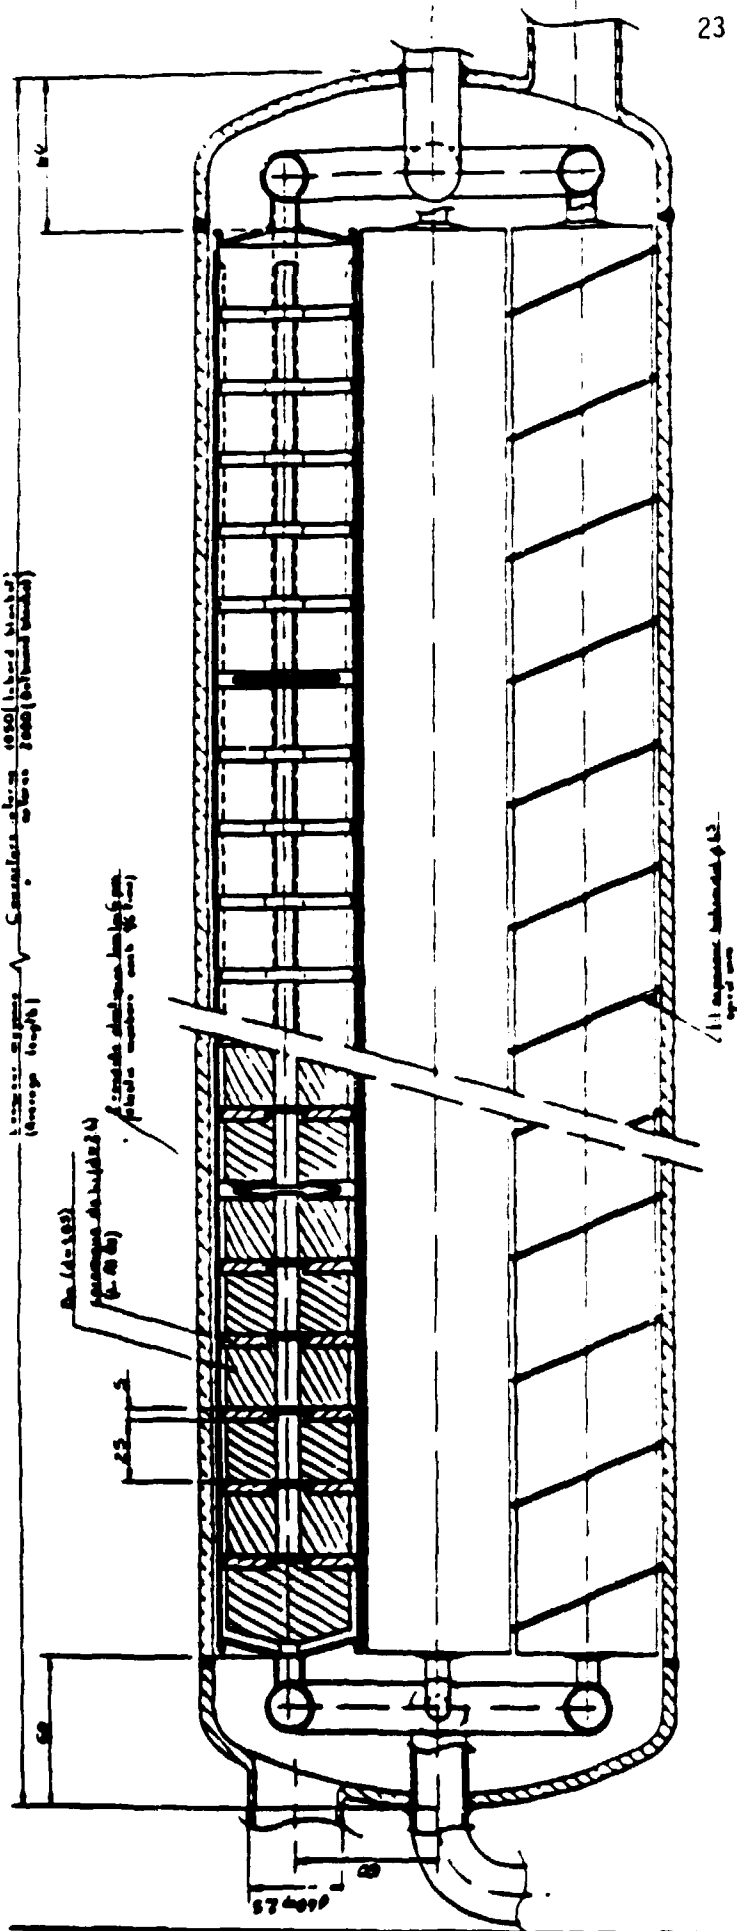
Helium Cooled Toroidal Blanket Concept. General Layout of Blanket Sectors.
